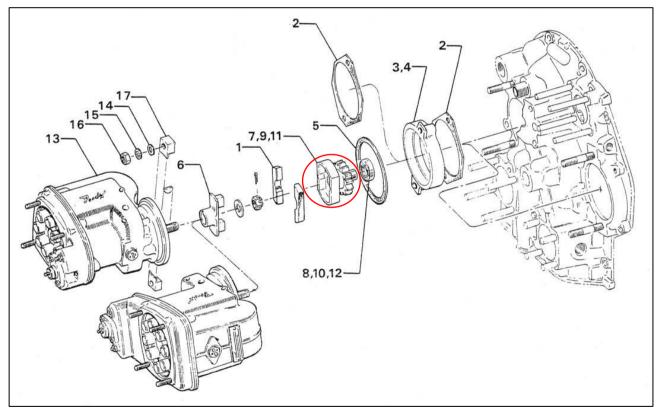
The ignition system indicating the magneto drive gear (red circle). (Source: Lycoming O-540 Parts Catalogue)
